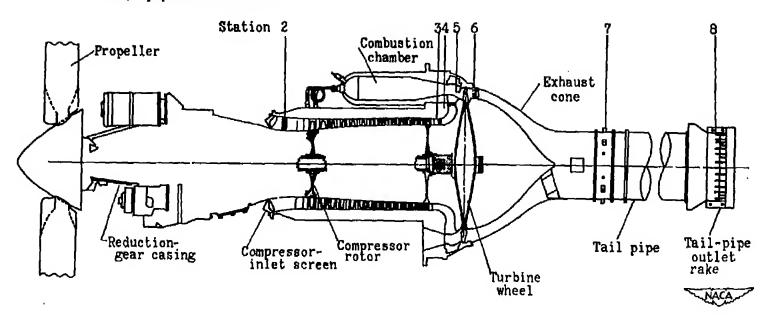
Side view of TG-100A engine showing location of measuring stations.
